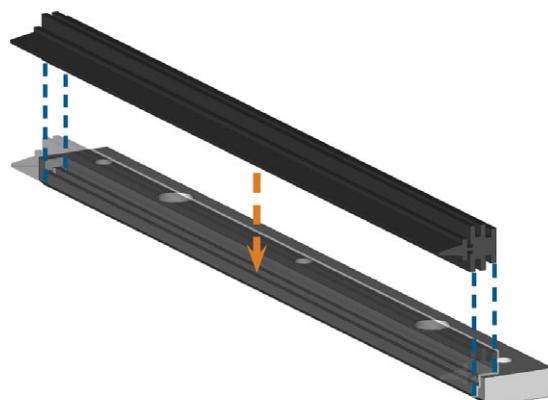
POSITIONING THE SPARE VIEW WINDOW WIPER
